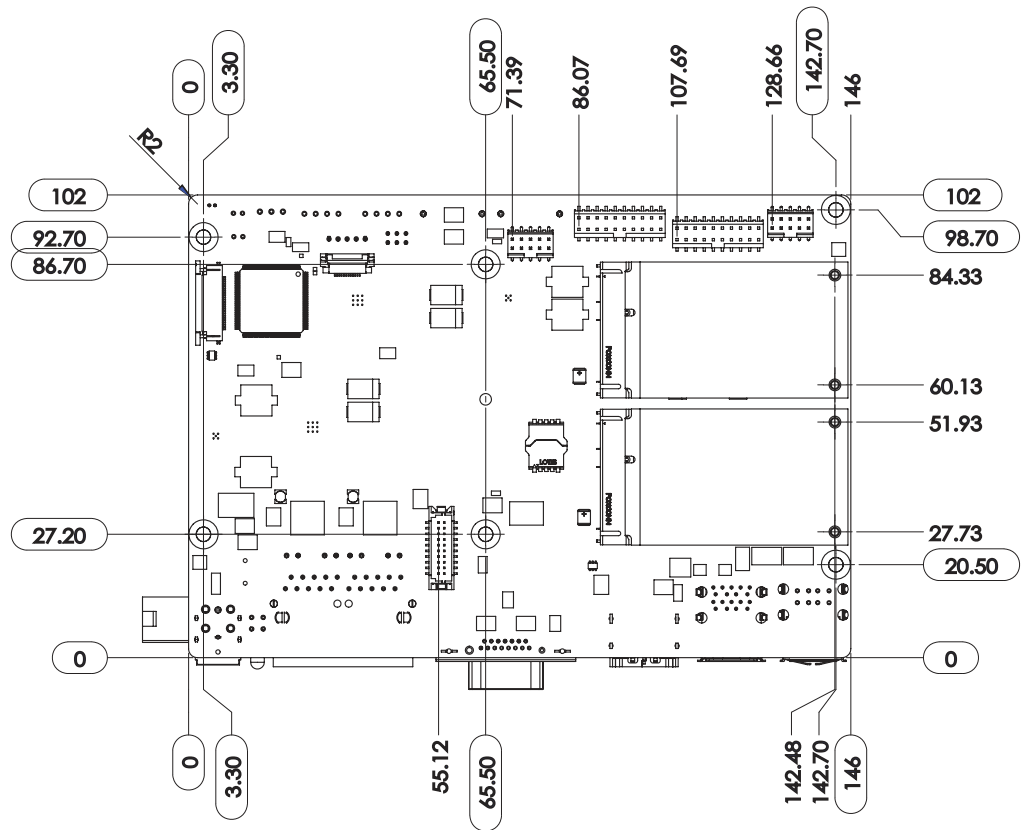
PCM-9310 Mechanical Drawing (Bottom Side)
